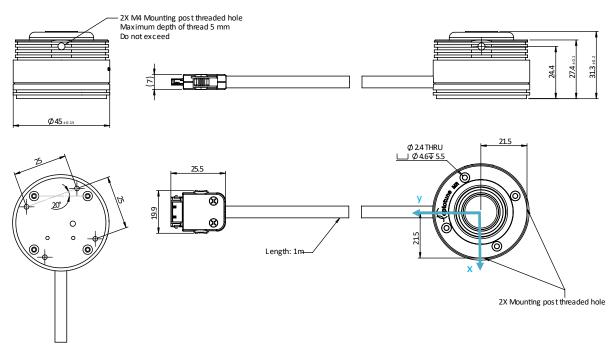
Mechanical drawing of the MR-E-3 head unit and cable assembly (unit: mm).
